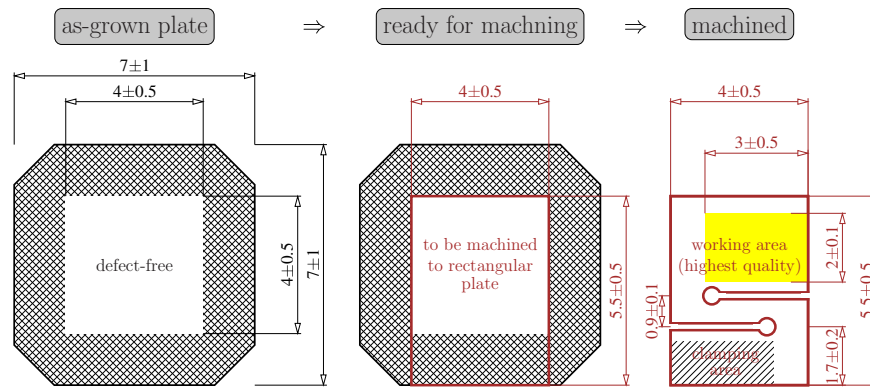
Drawings of the required diamond crystal plates: as grown, marked up for machining, machined.
